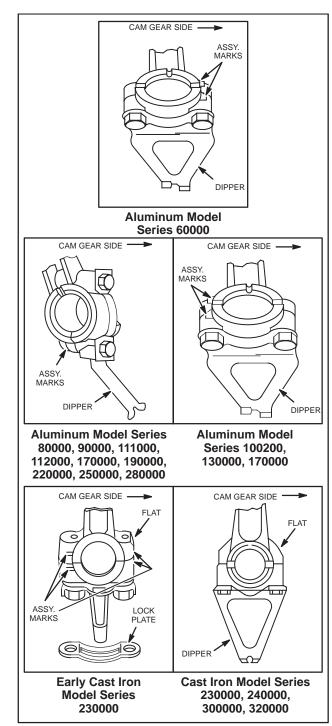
CONNECTING ROD INSTALLATION, HORIZONTAL CRANKSHAFT ENGINES
